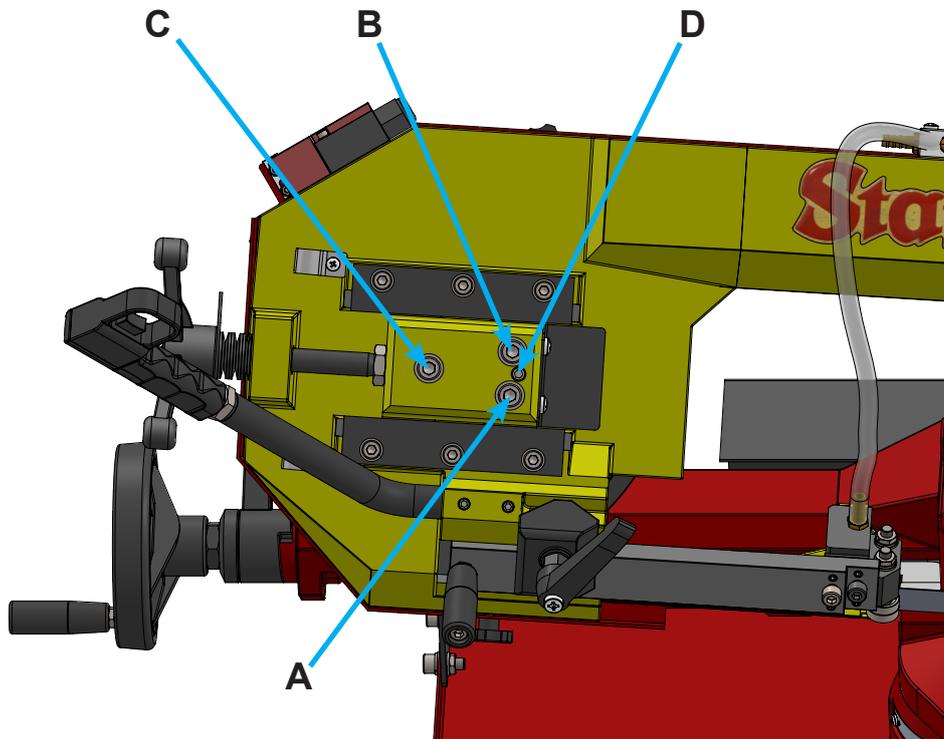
BACK BEARING ADJUSTMENT – MOBILE GUIDE
